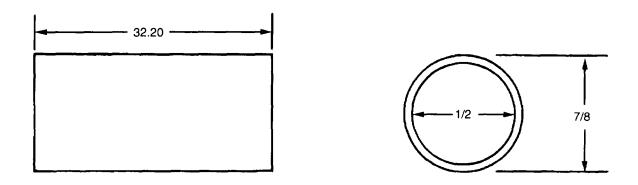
Hydraulic Brake Tube Assembly, Right (M101A3 and M116A3)
